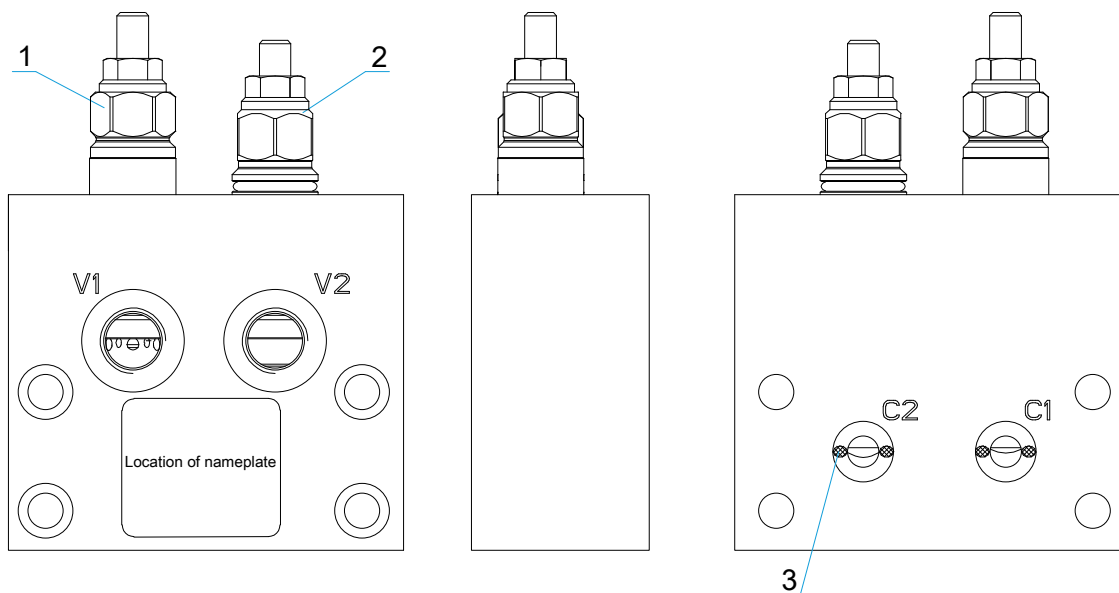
Telescoping counterbalance valve (PN.202040003012)
